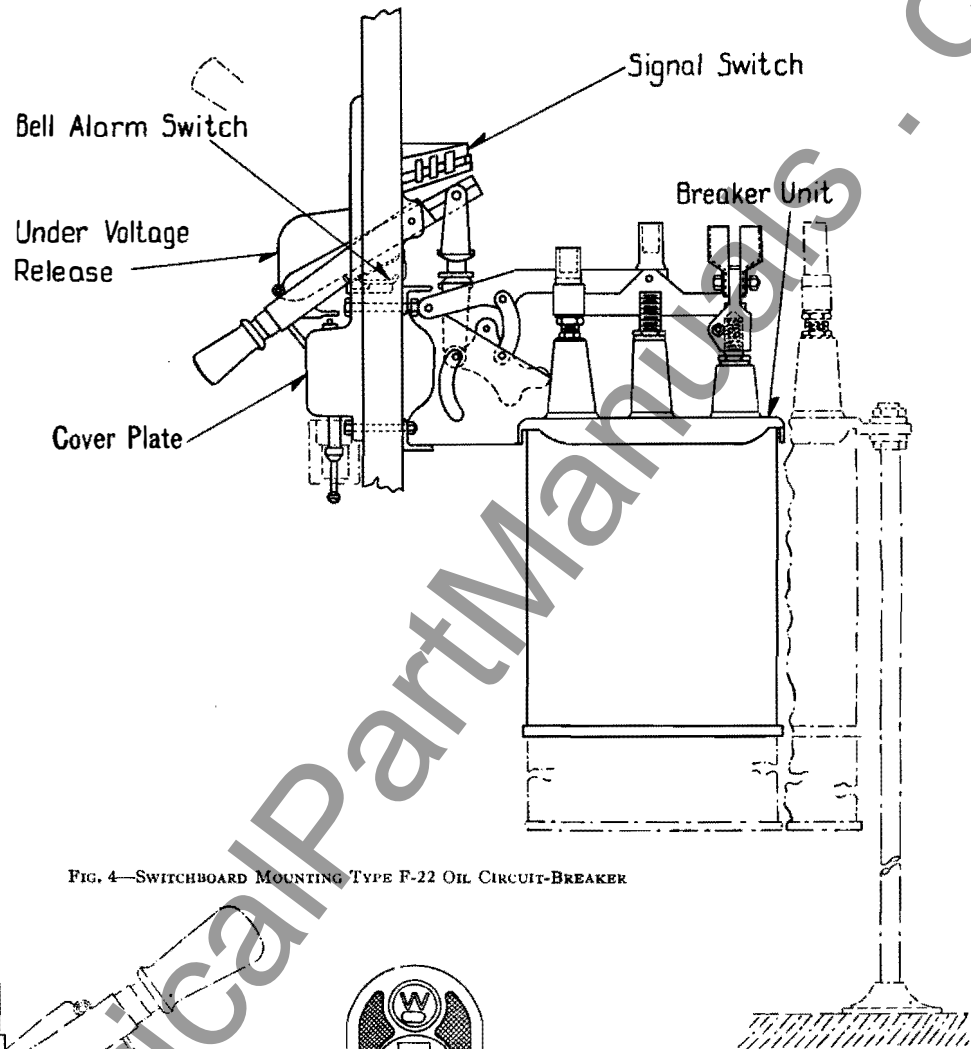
SWITCHBOARD MOUNTING TYPE F-22 OIL CIRCUIT-BREAKER
